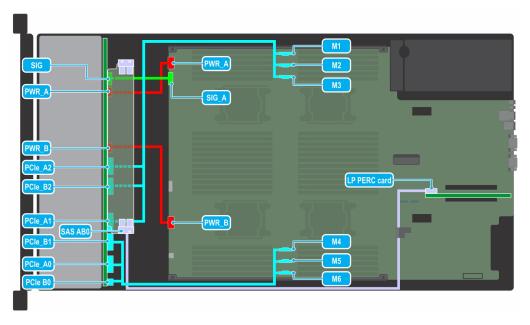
Cable routing - 24×2.5 inch, (SAS/SATA) drive backplane supporting x12 universal (SAS/SATA/NVMe) slots with GPU and single PERC card
